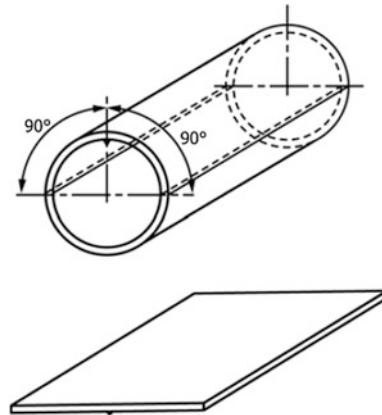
Reverse flattening test of pipes or tubes (ASTM A370)
